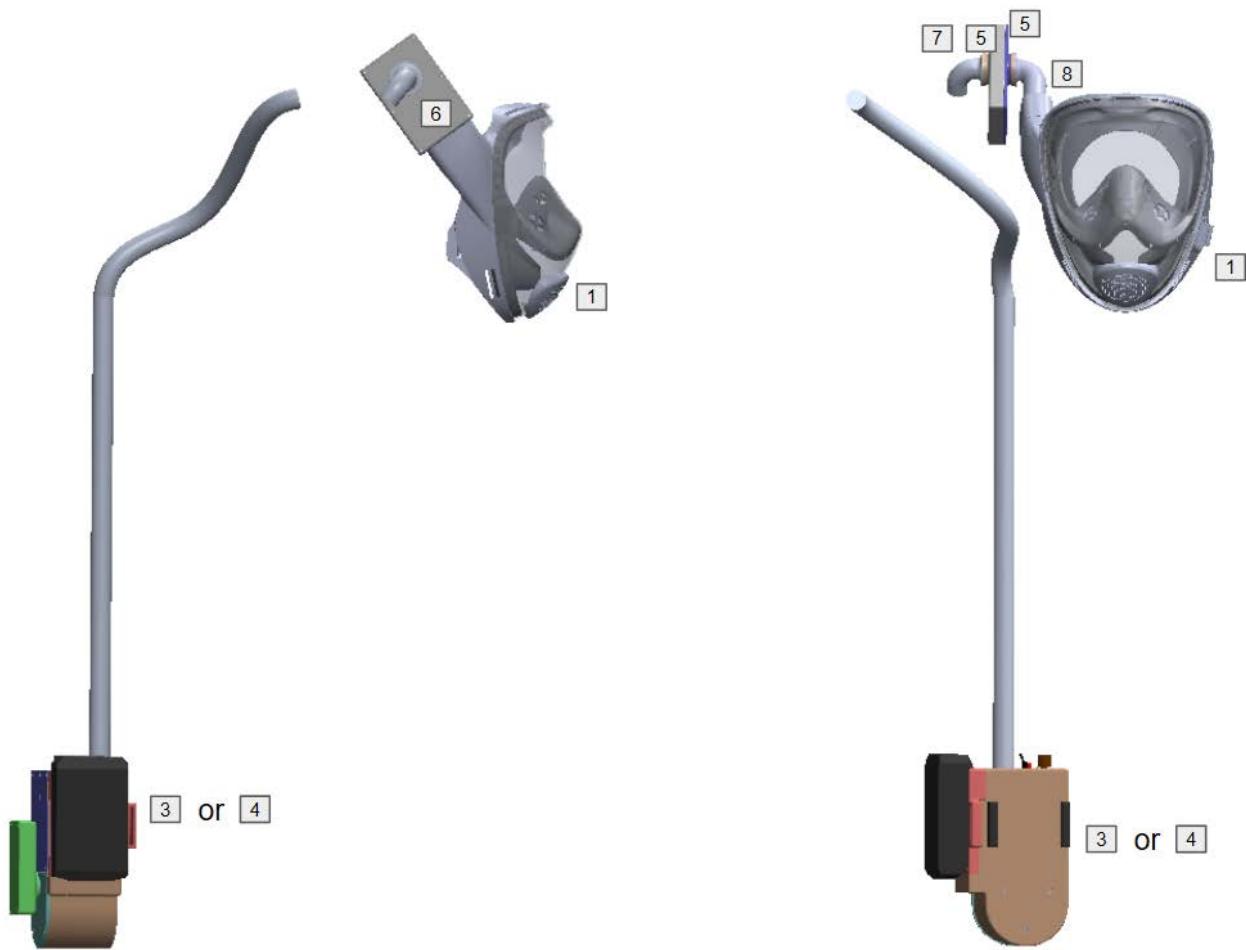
Blower Assembly, Snorkel Mask & Filter Assembly w/ Adapters
